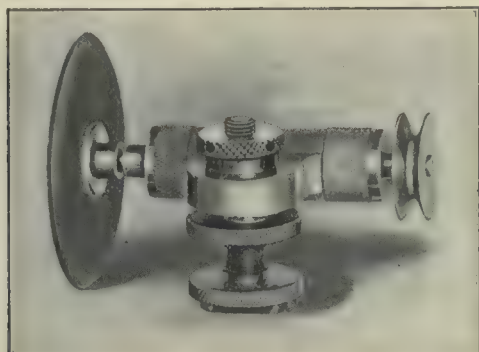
EXTERNAL-GRINDING ATTACHMENT
